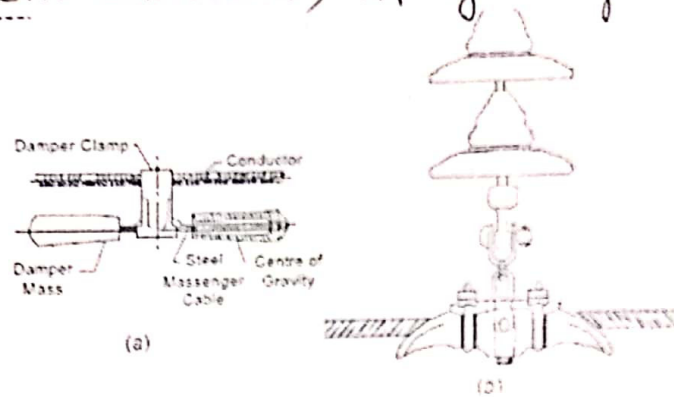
(a) Stockbridge Damper; (b) Suspension Clamp. Courtesy: Electrical Manufacturing Co., Calcutta.
